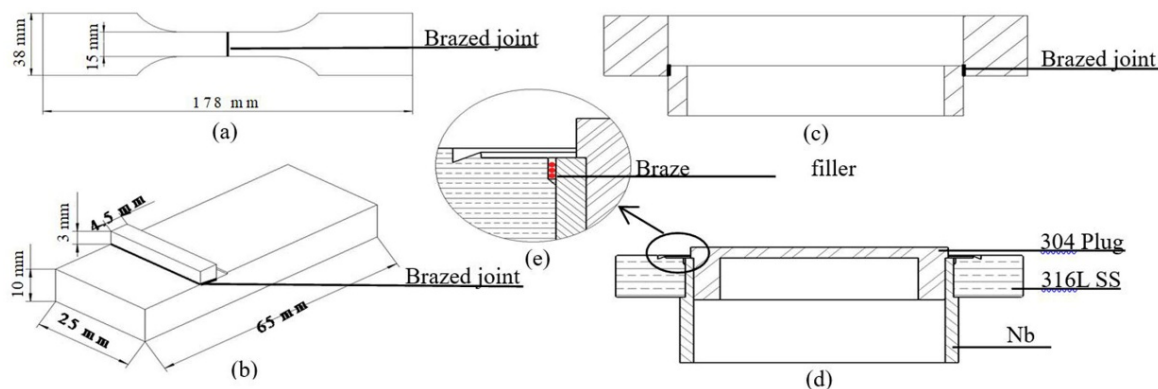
(a) Dimensional details of tensile test samples (b) Dimensional details of shear test samples (c) Schematic diagram of ultimate shear tests samples (d) Braze joint configuration (e) Partial enlarged view of brazing placement
